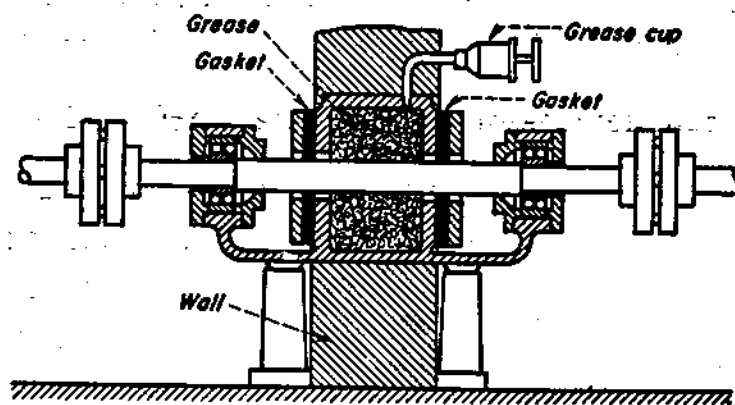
Firewall extension similar to Fig. 6-11 in principle but with ball bearings supported by brackets.
